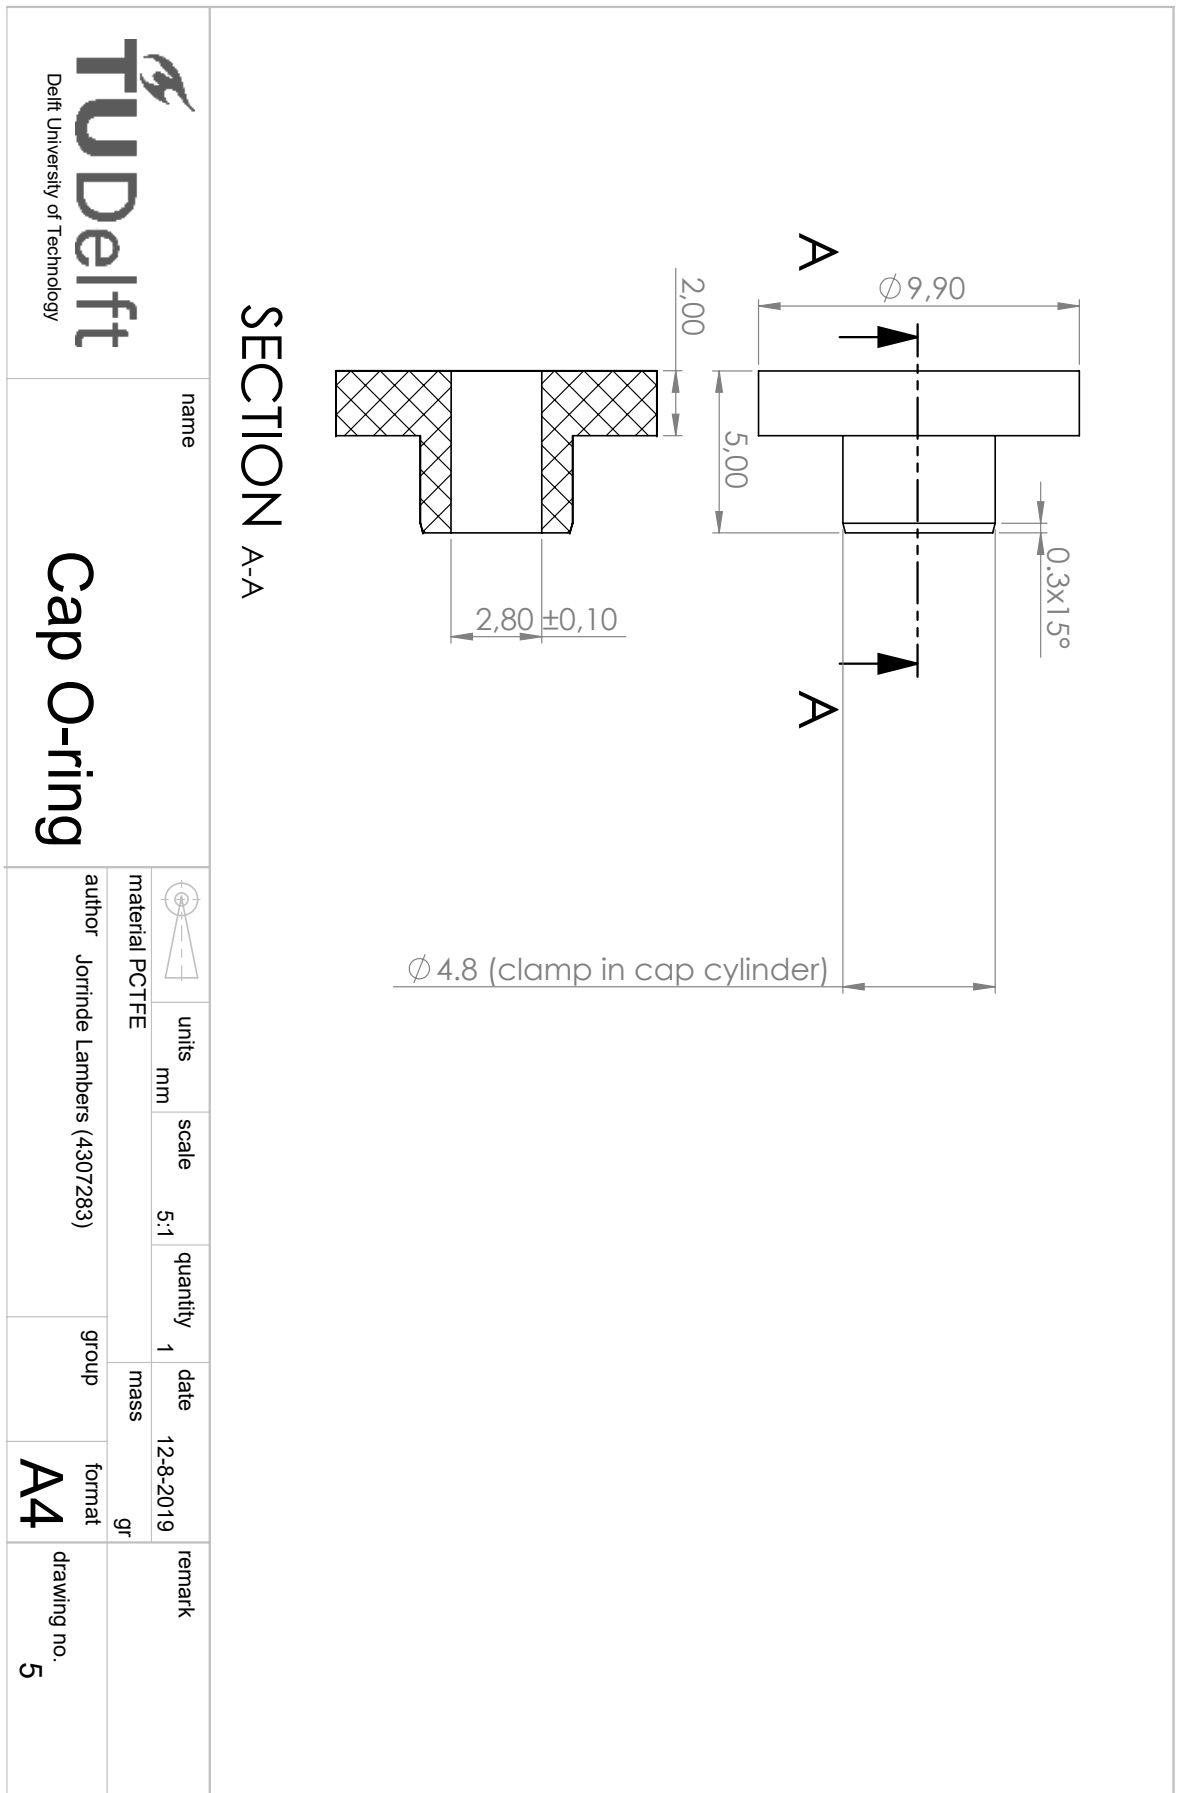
SolidWorks drawing of component number 5: Cap O-ring.
